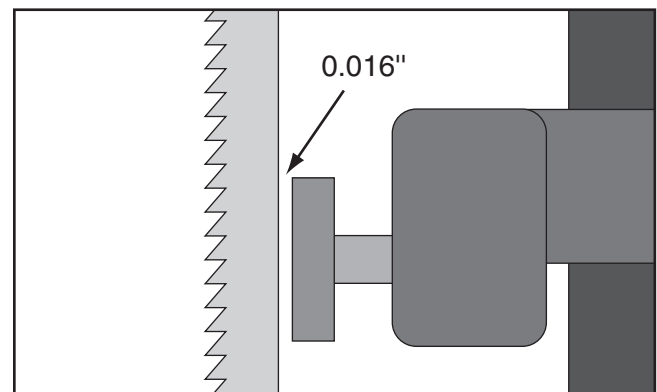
Blade should be perpendicular (90°) to the face of the support bearing.
